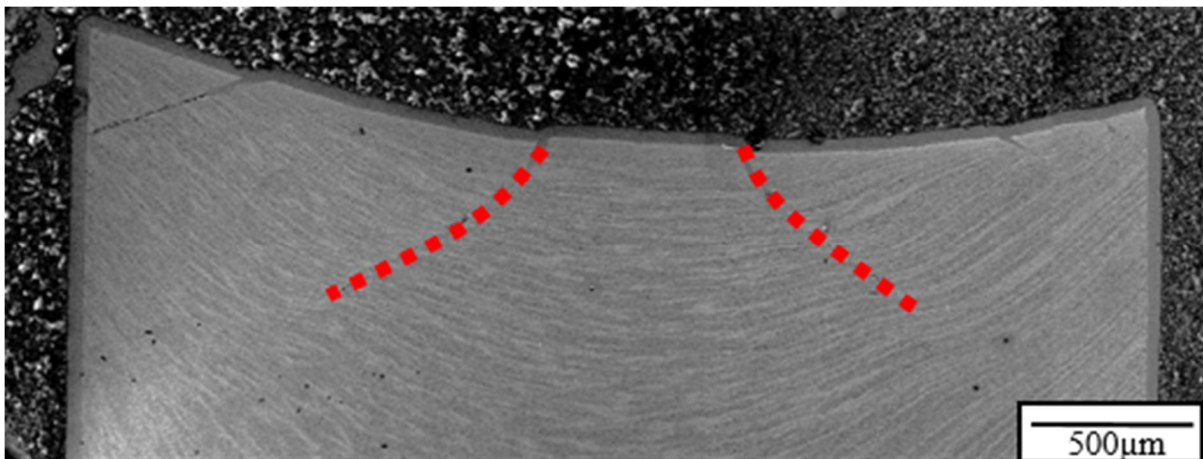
1 3 Fracture surface observation after Hole expansion test.
